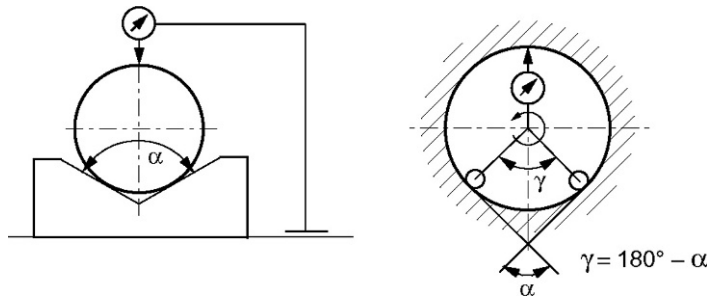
Three-point measurement: summit method, symmetrical setting
